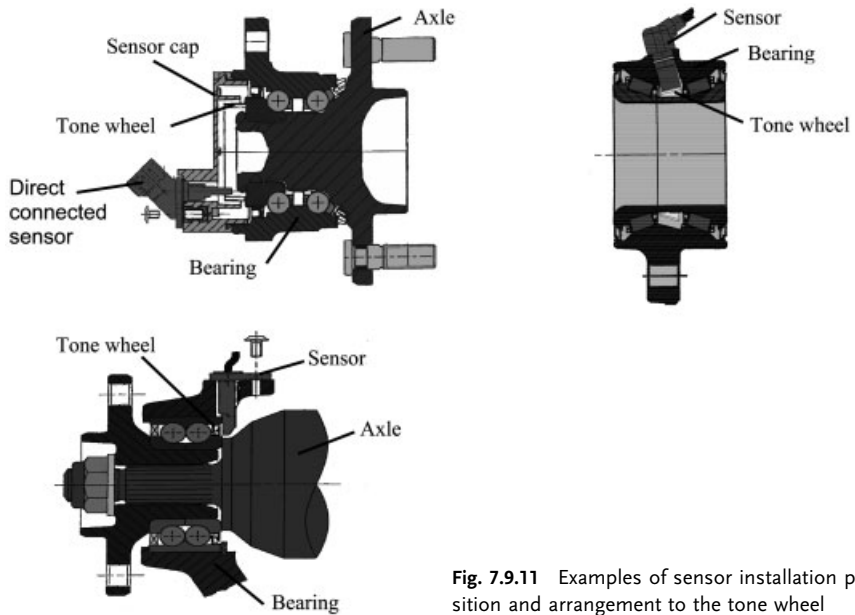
Examples of sensor installation position and arrangement to the tone wheel
